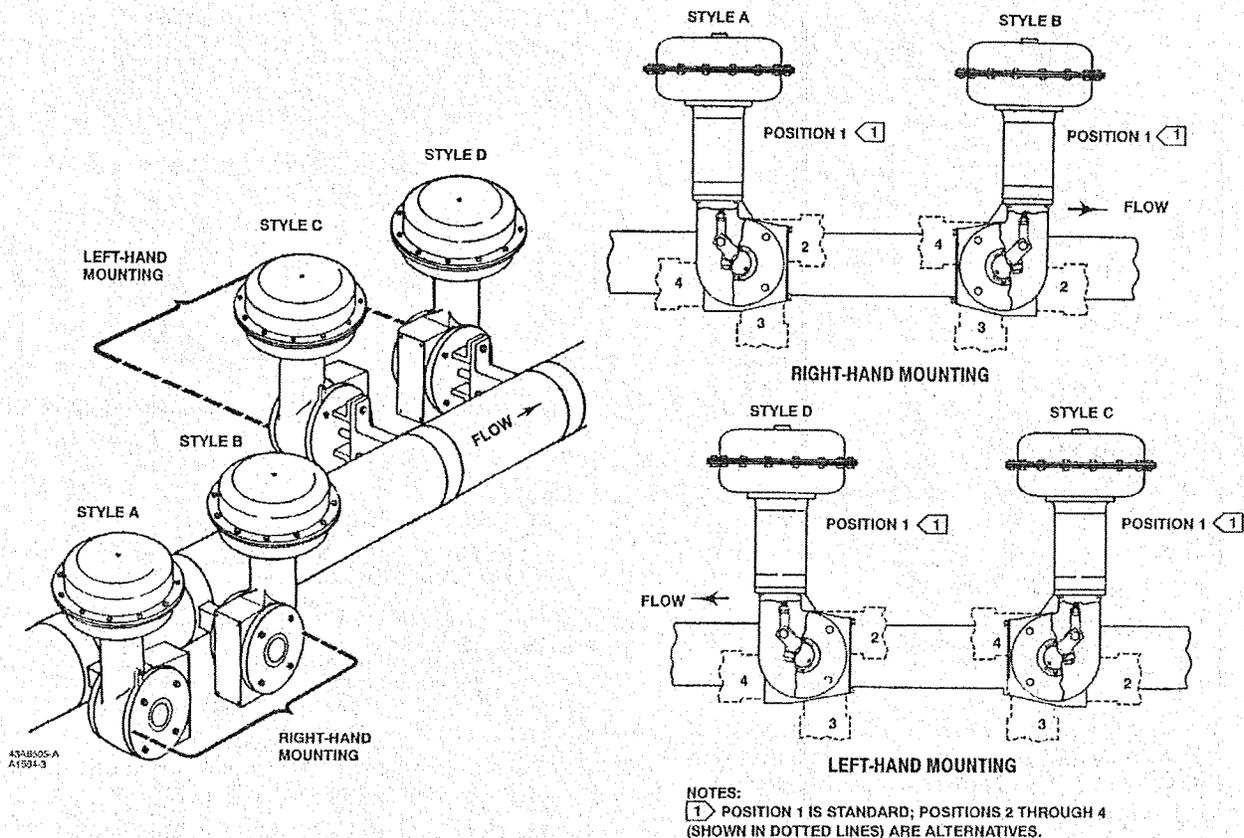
Mounting Styles and Positions for the Type 1051 and 1052 Actuator
